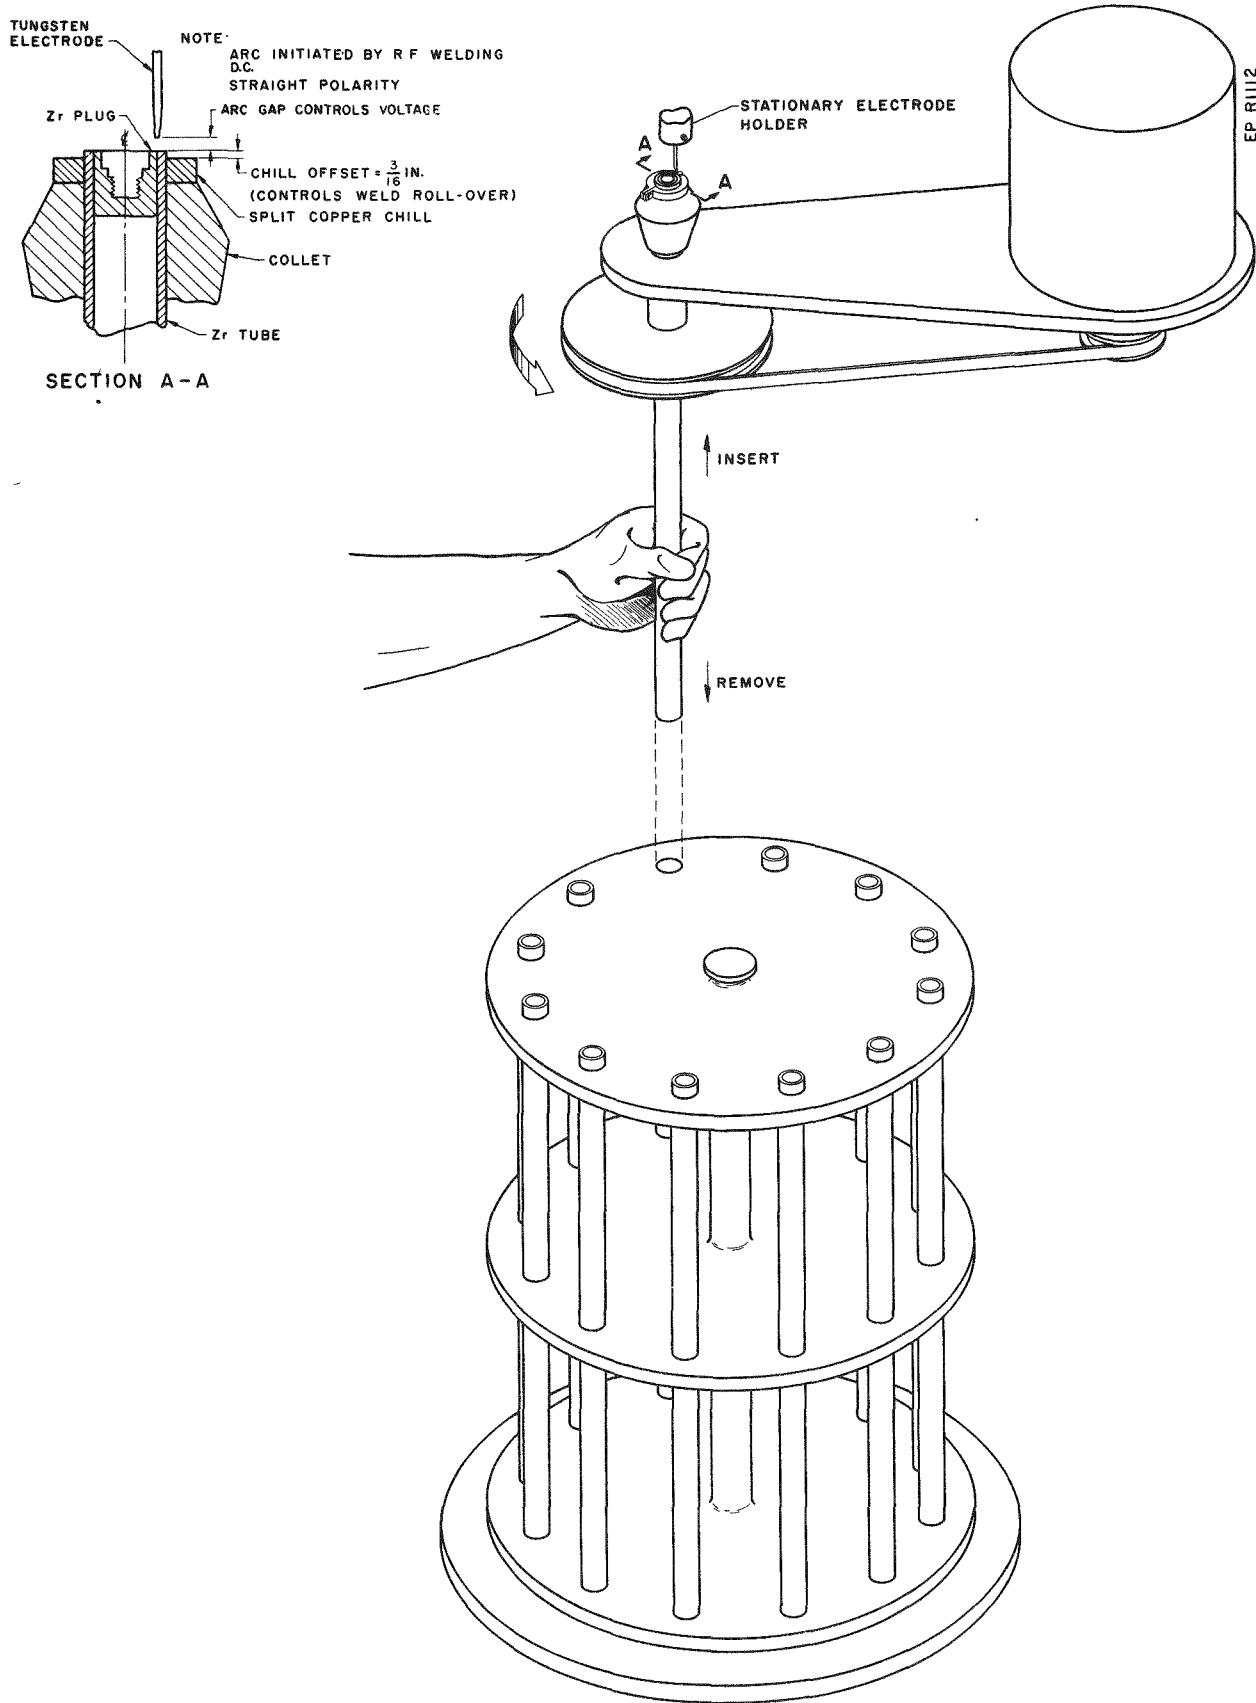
TIG Welding Setup for U-233 Rods.
